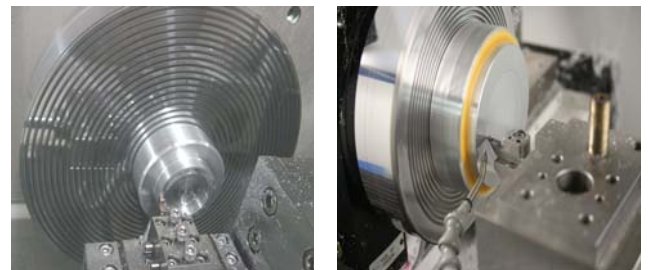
Workpiece of cutting sample (Al6061-T651)
